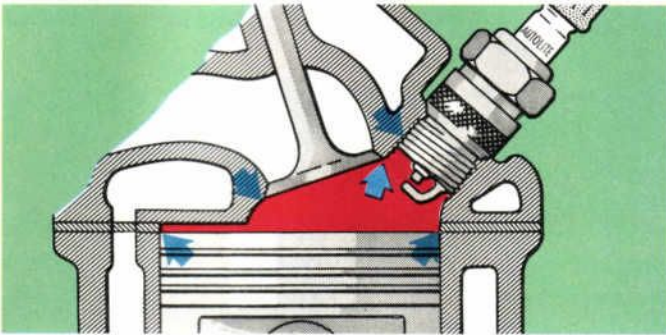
HOT SPOTS IN COMBUSTION CHAMBER
